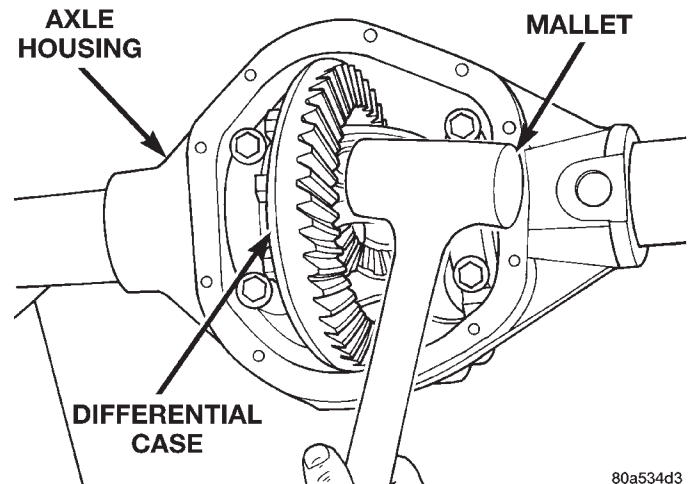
Seat Ring Gear Side Differential Dummy Side Bearing—Typical
